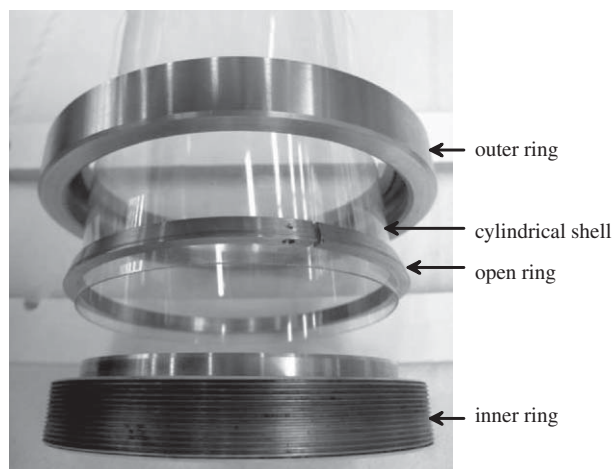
Exploded view of one clamping ring for cylindrical shell.
